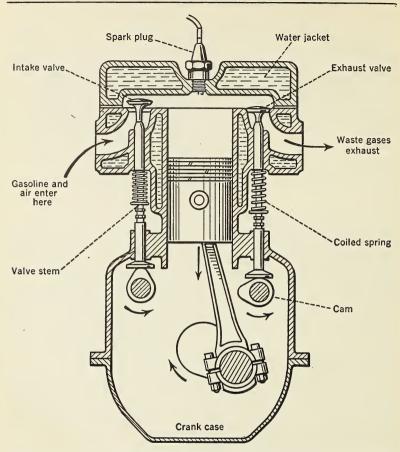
A cross-sectional view of one piston and cylinder of a gas engine.
